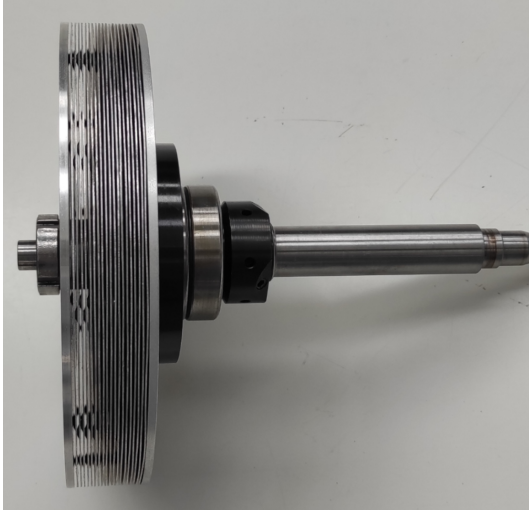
Side view of the rotor with some spacing dents visible between the disks.
